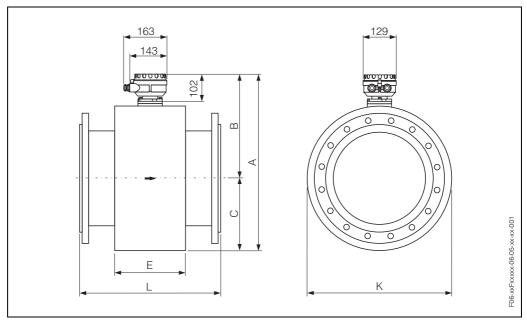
Dimensions Promag W / DN \ge 350 (remote version) Dimensions wall-mounted housing \rightarrow see Page 122
